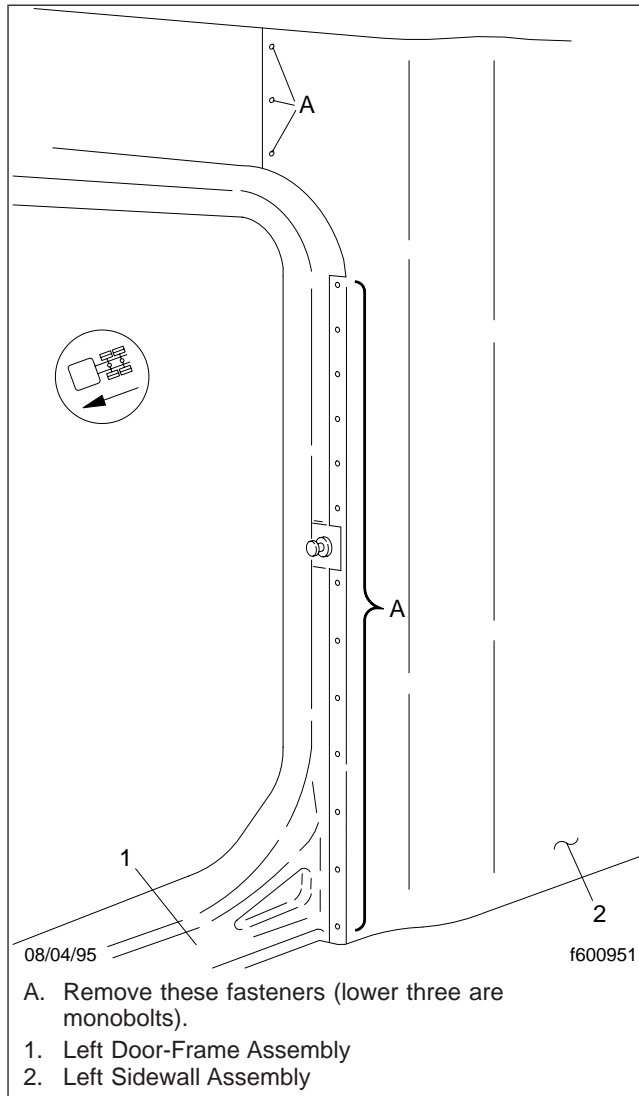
, Sidewall-to-Door Frame Henrob Rivets
